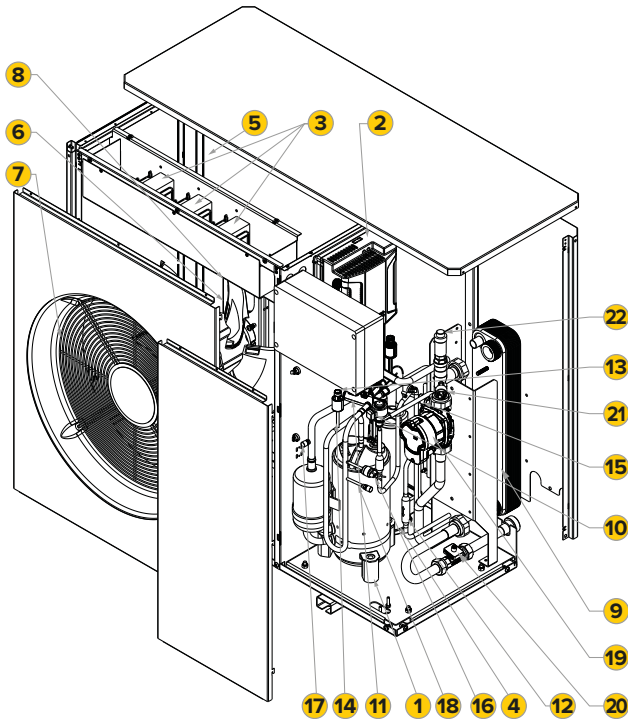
Design of the heat pump outdoor unit ZHHH-01-10K-R290-R5-M
